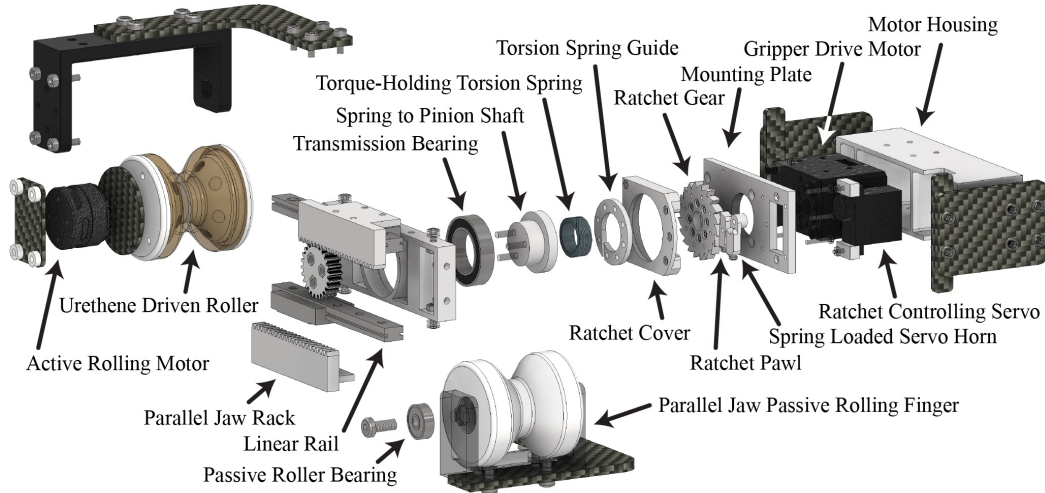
Exploded view of the gripper module with a driven roller. The ratchet mechanism takes all load off the gripper drive motor to minimise power draw. The driven roller is used to travel along the power line.
